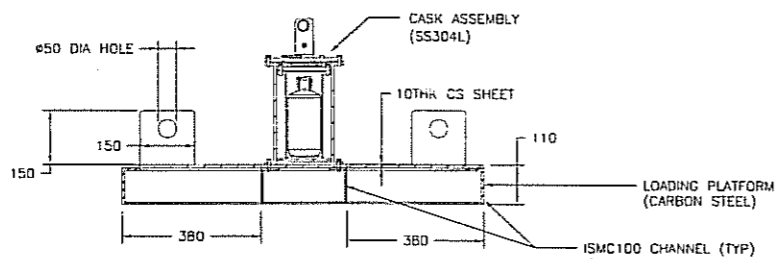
TDD-RSMS-M-72 rev 0 Sheet1
